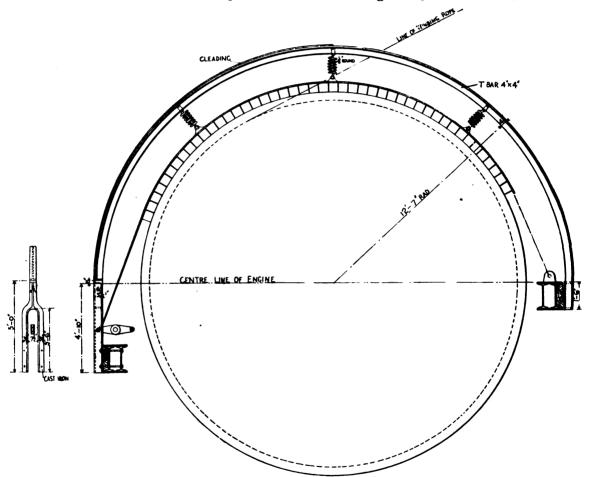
HYLTON WINDING ENGINES.—METHOD OF SUPPORTING TOP BRAKE STRAP.
